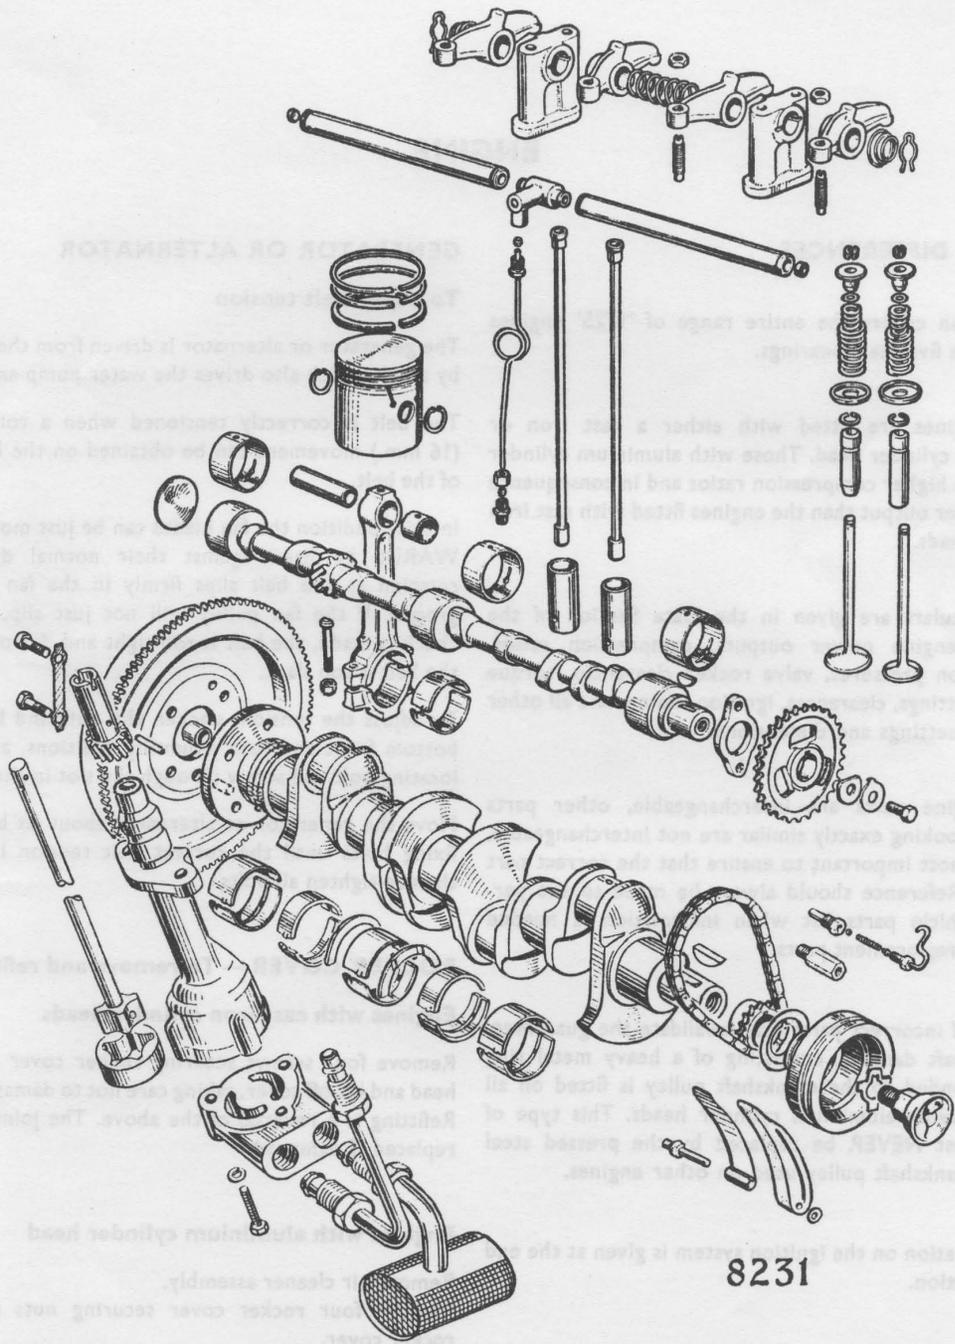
Exploded view of working parts—engines with aluminium cylinder heads.
